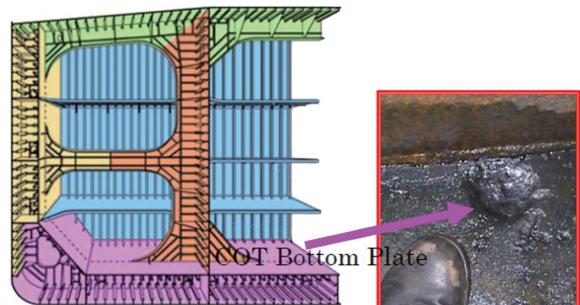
Example of pit corrosion on COT (Crude Oil Tank)
